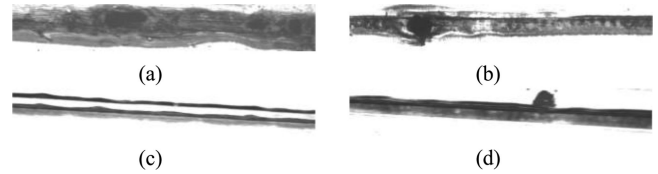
(a) Weld fusion. (b) Weld perforation. (c) Cold solder joint. (d) Pseudodefekt.
